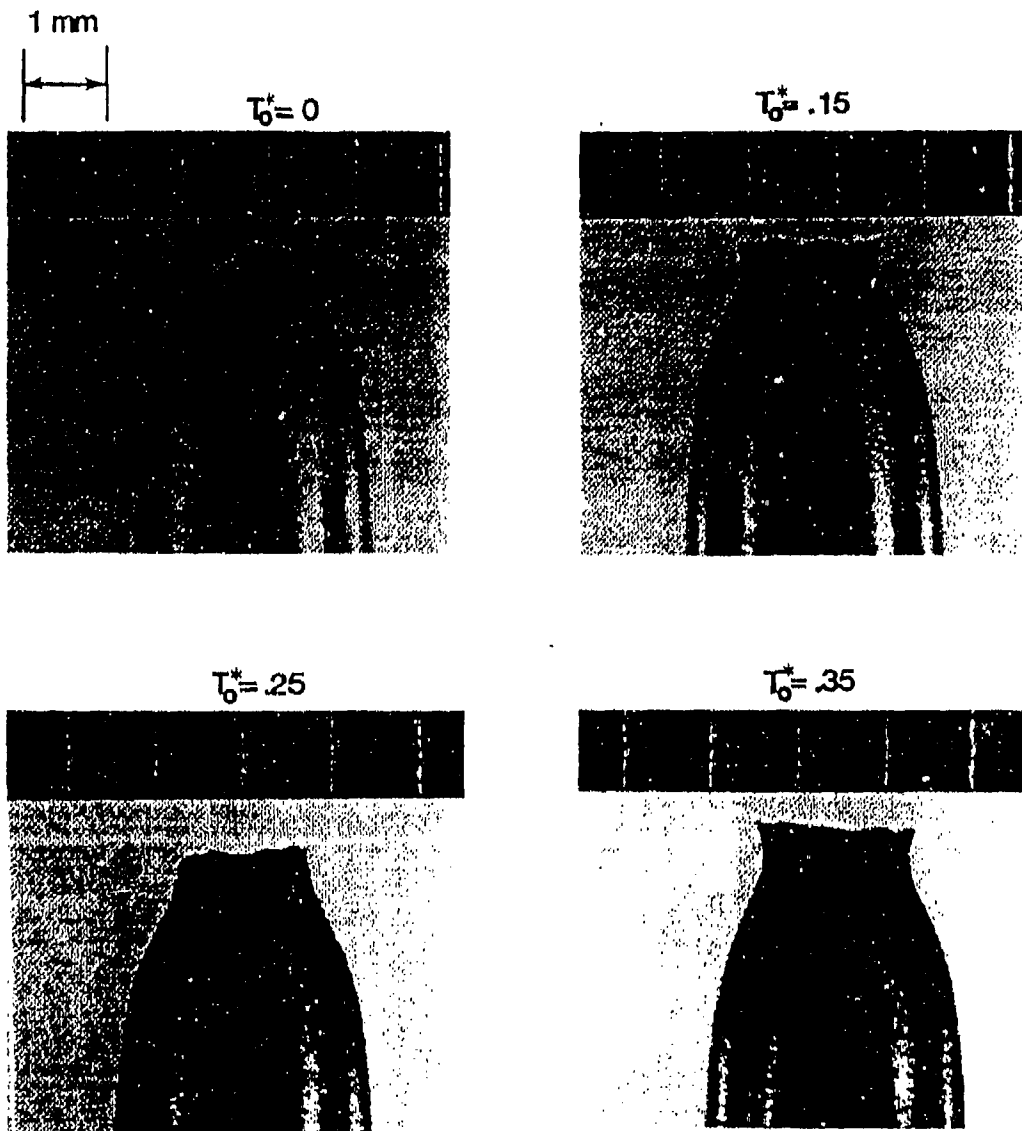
PHOTOGRAPHS OF THE FRACTURE PROFILES ON THE HY-130 STEEL HOPKINSON BAR SPECIMENS
